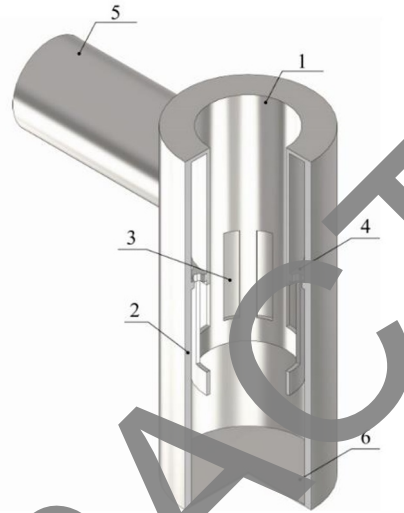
CMVC: (1) inner pipe; (2) outer pipe; (3) rectangular openings; (4) plate with holes; (5) outlet branch pipe; (6) bottom.
